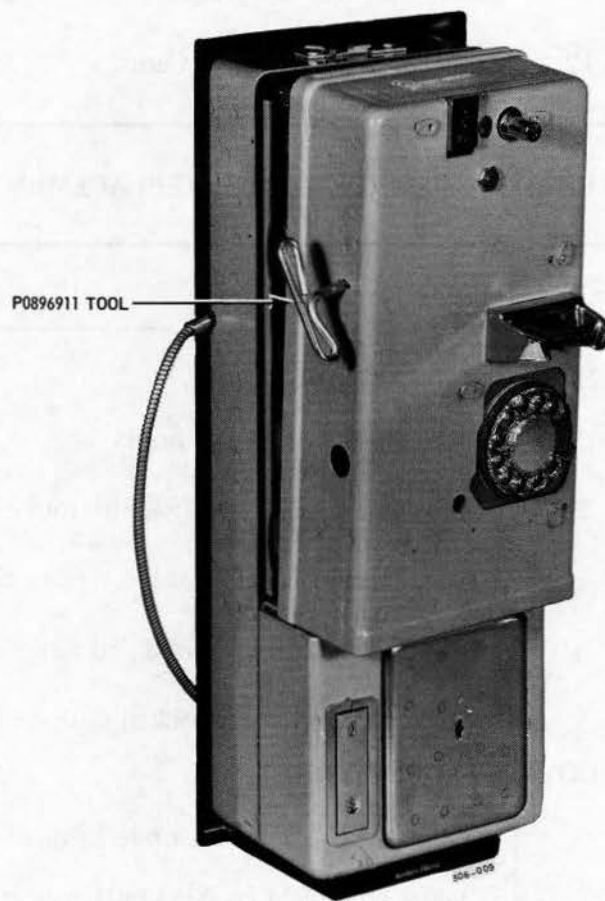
Coin Telephone Set Showing the Location of P0896911 Tool When Unlocking the Cover Unit Assembly
